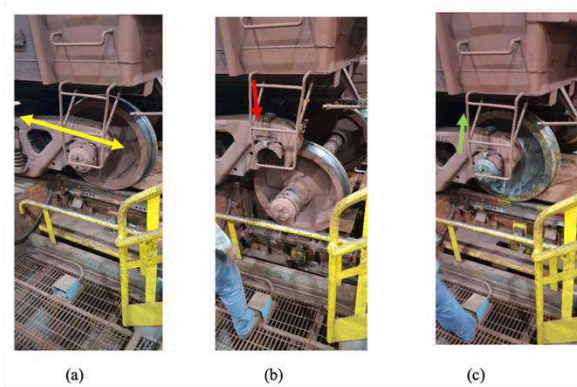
Sequence of steps when changing wheels: positioning the wagon wheel on the table (a), removing the defective wheel (b) and installing the new wheel (c).
